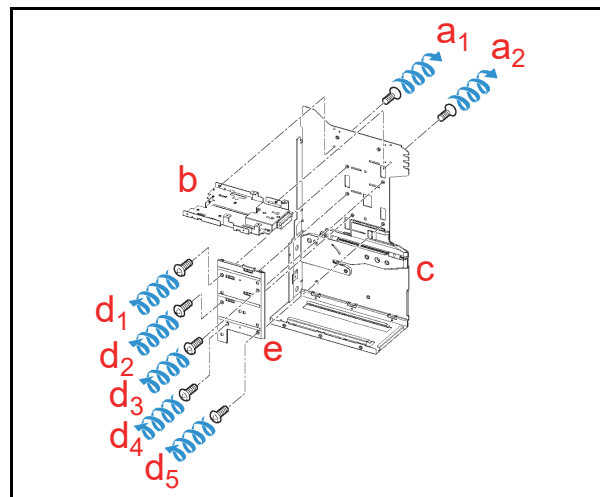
Full Sensor PTs and End Sensor LEDs Removal
